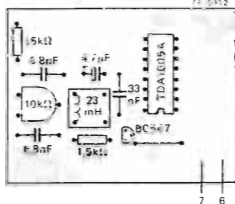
Printed-circuit board component side, showing component layout of Fig. 19.
